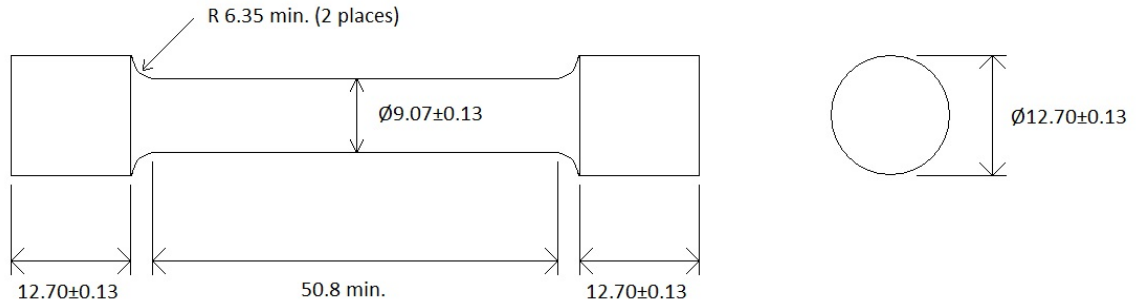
Tensile test specimen with machined surface. All dimensions in mm.
